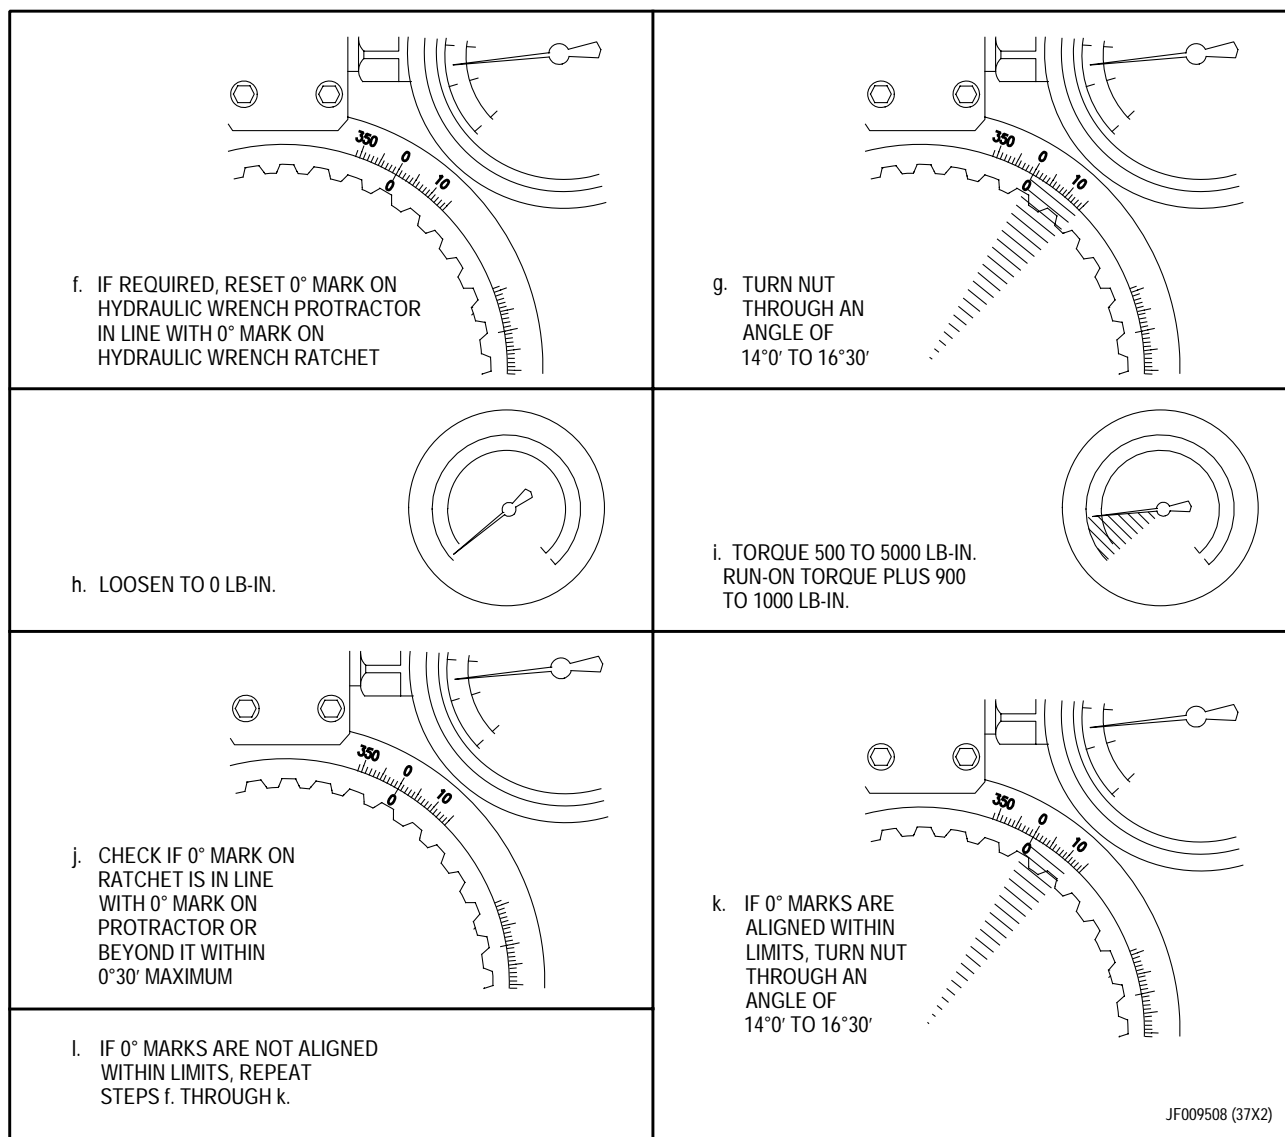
No. 1 Bearing Inner Race Retaining Nut - Torque (Sheet 2 of 2)
